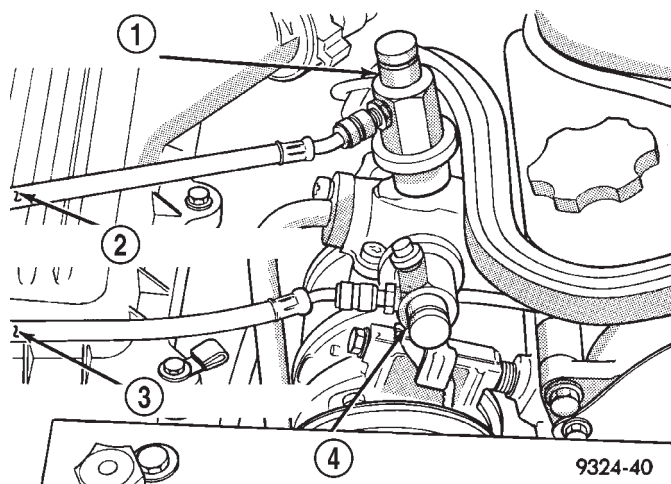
Manifold Gauge Hook-up (3.2 / 3.5L)
